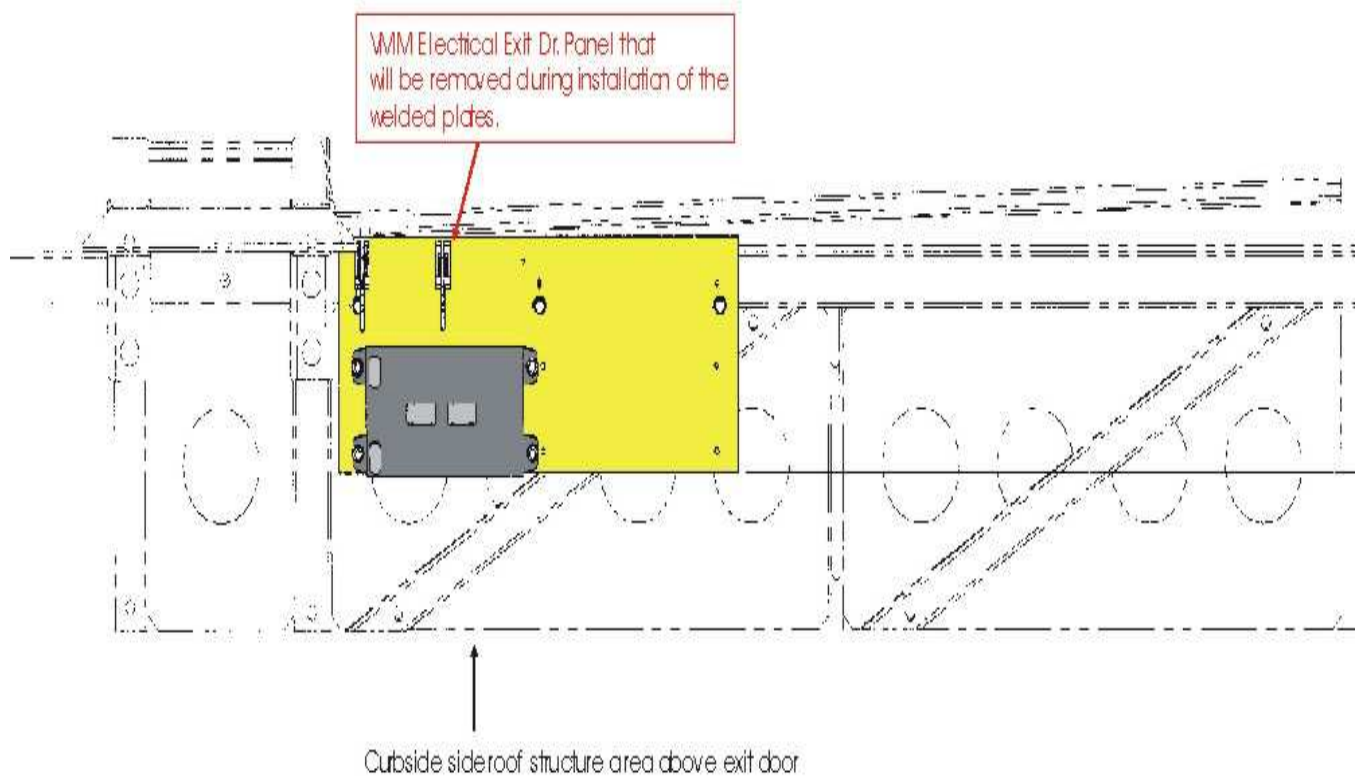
A: SHOWN SIDE VIEW WITH THE APPLICABLE MOUNTING HARDWARE
